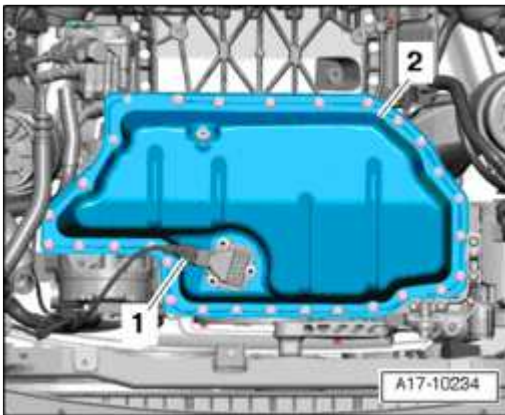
Identifying Oil Level Thermal Sensor G266 Electrical Connector & Oil Pan (Lower Part)
